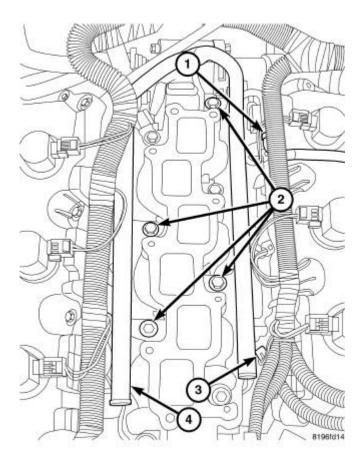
Fuel Supply Hose, Mounting Bolts, Electrical Connectors & Fuel Rail Courtesy of CHRYSLER LLC
